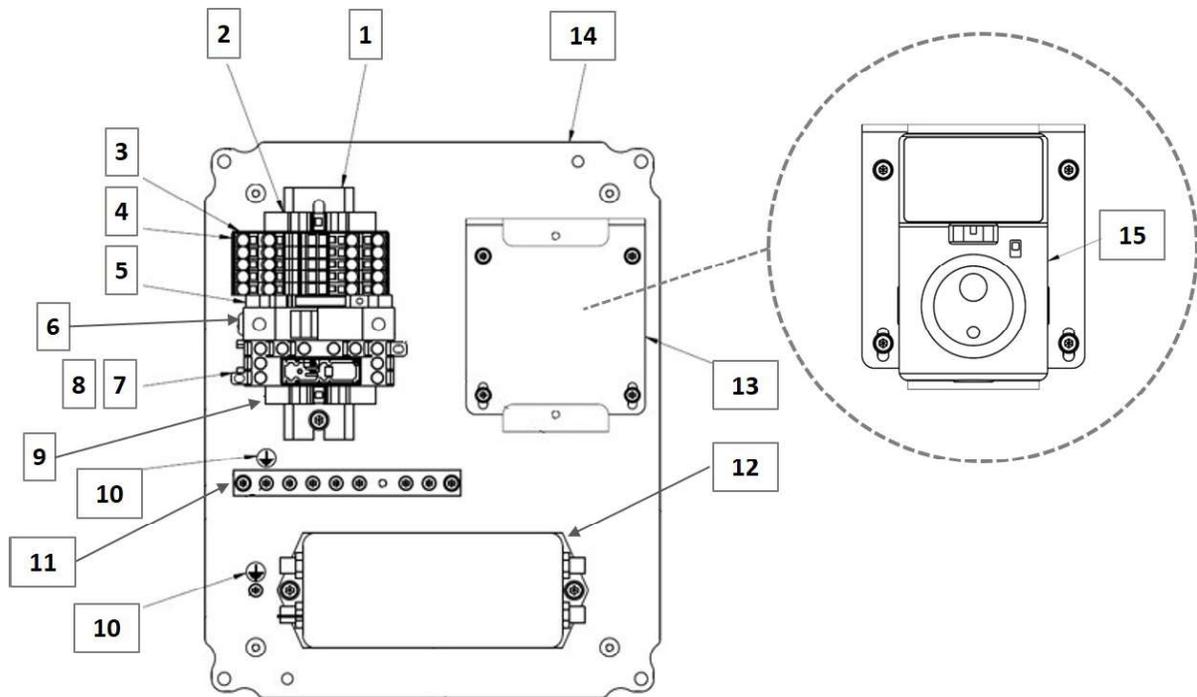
CONVEYOR MOTOR OUTFEED PANEL, P/N 3-009090
